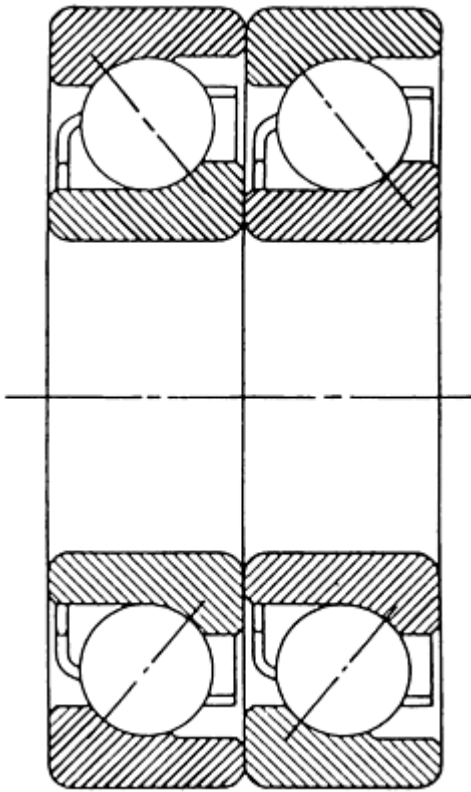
Pair of angular-contact ball bearings mounted in tandem
